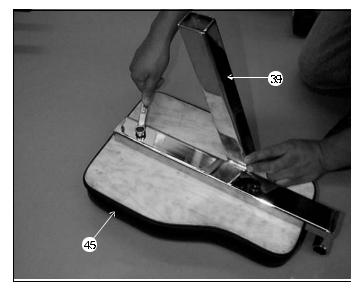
Attach the Seat Pad (Bench Press) (#45) to the Bench Press Adj Seat Tube (#39) and secure it using two Hex Head Cap Screws 3/8-16 X 1 3/4 (#79) and two Flat Washers SAE 3/8 (#90), as shown above.
